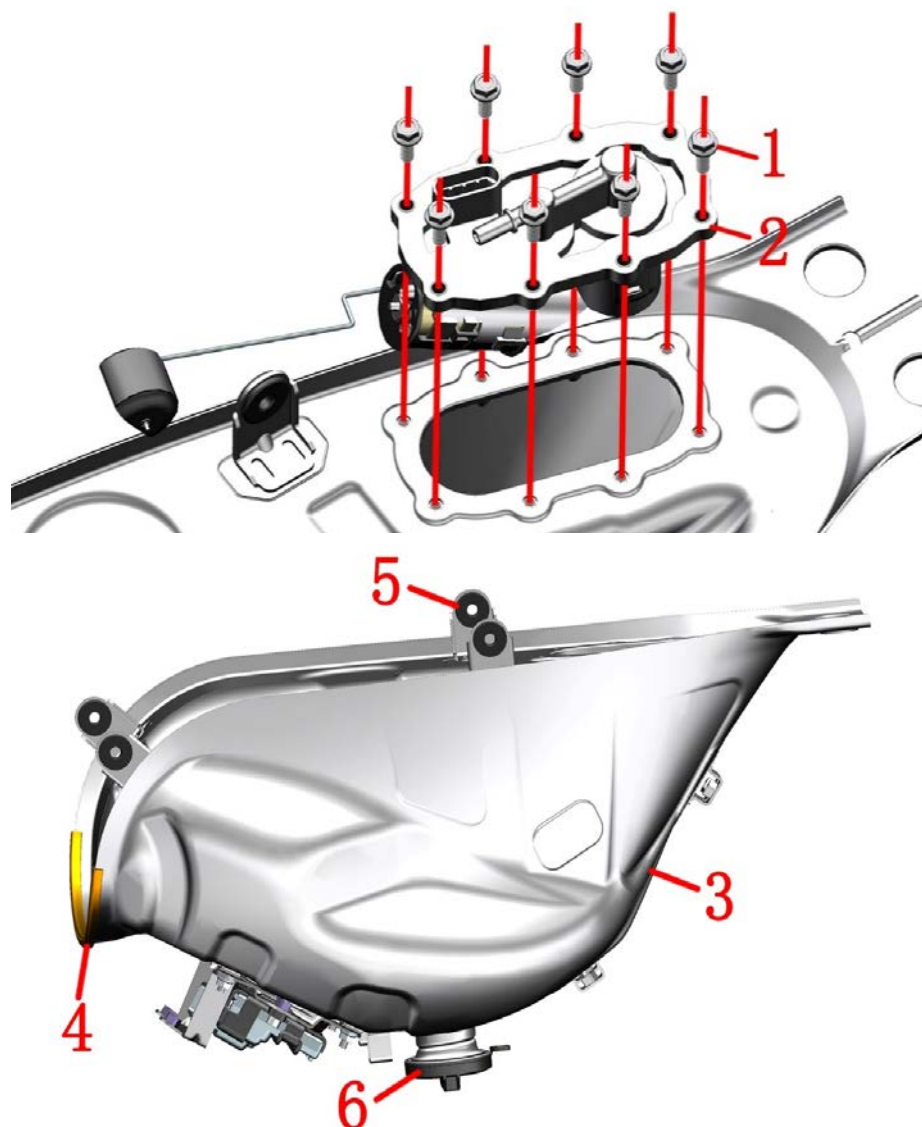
Fuel Tank Assembly		Fuel Tank Liner	CHK	CAUTION
